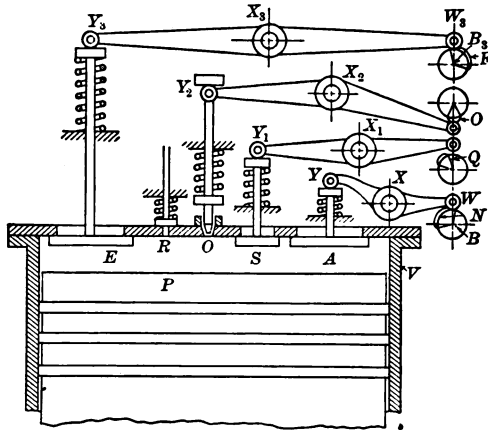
DIAGRAMMATIC ARRANGEMENT OF VALVES, ROCKERS, AND CAMS FOR DIESEL ENGINE CYLINDER
